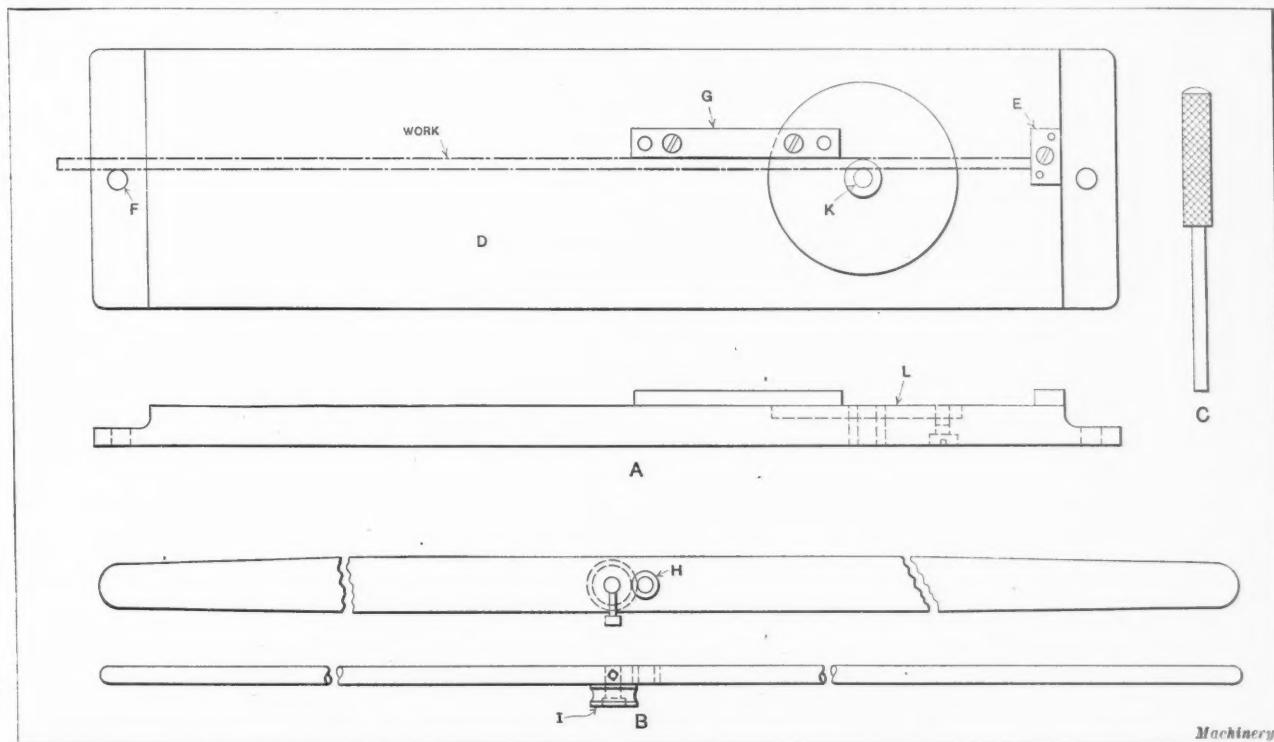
Fixture used in bending T-handle to shape shown at A, Fig. 4
